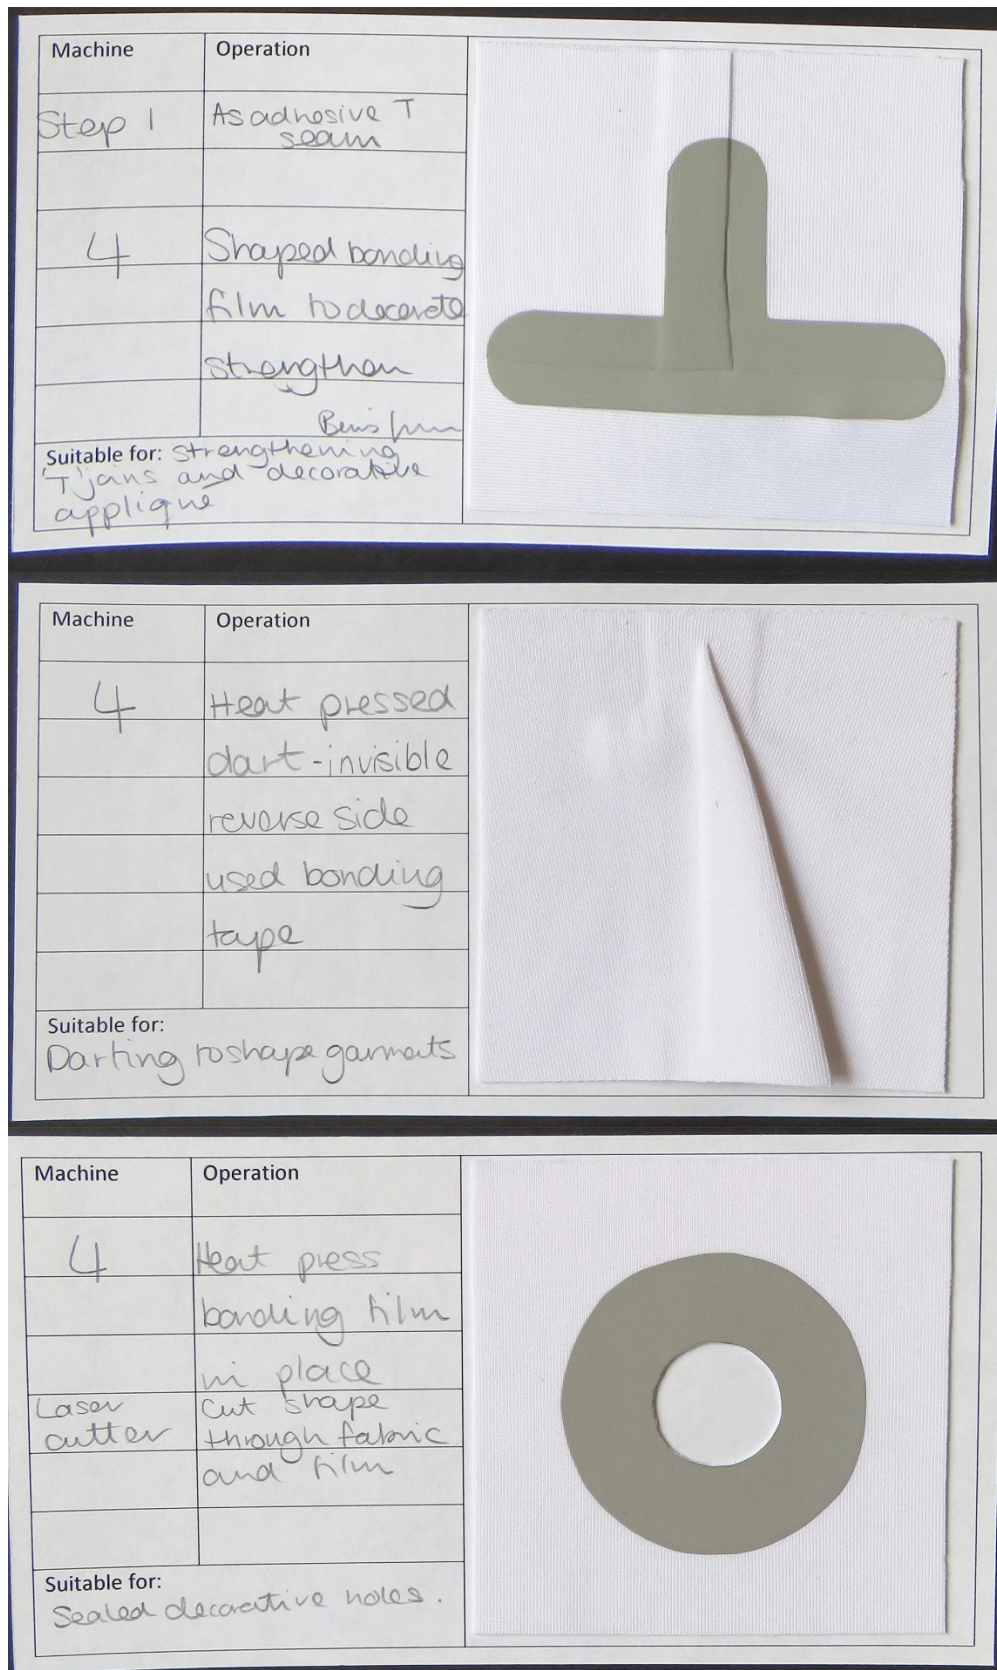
Samples of garment construction ideas (Source: Etheridge, E. 2018)
